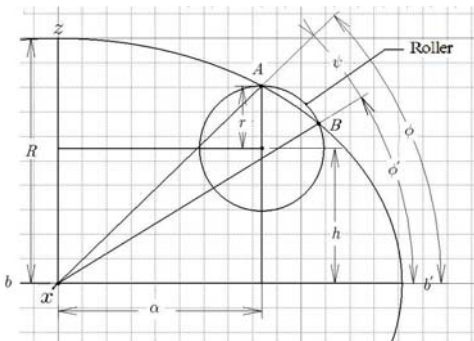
2D cross-sectional view of a roller around Mecanum wheel according to $b - b'$.
